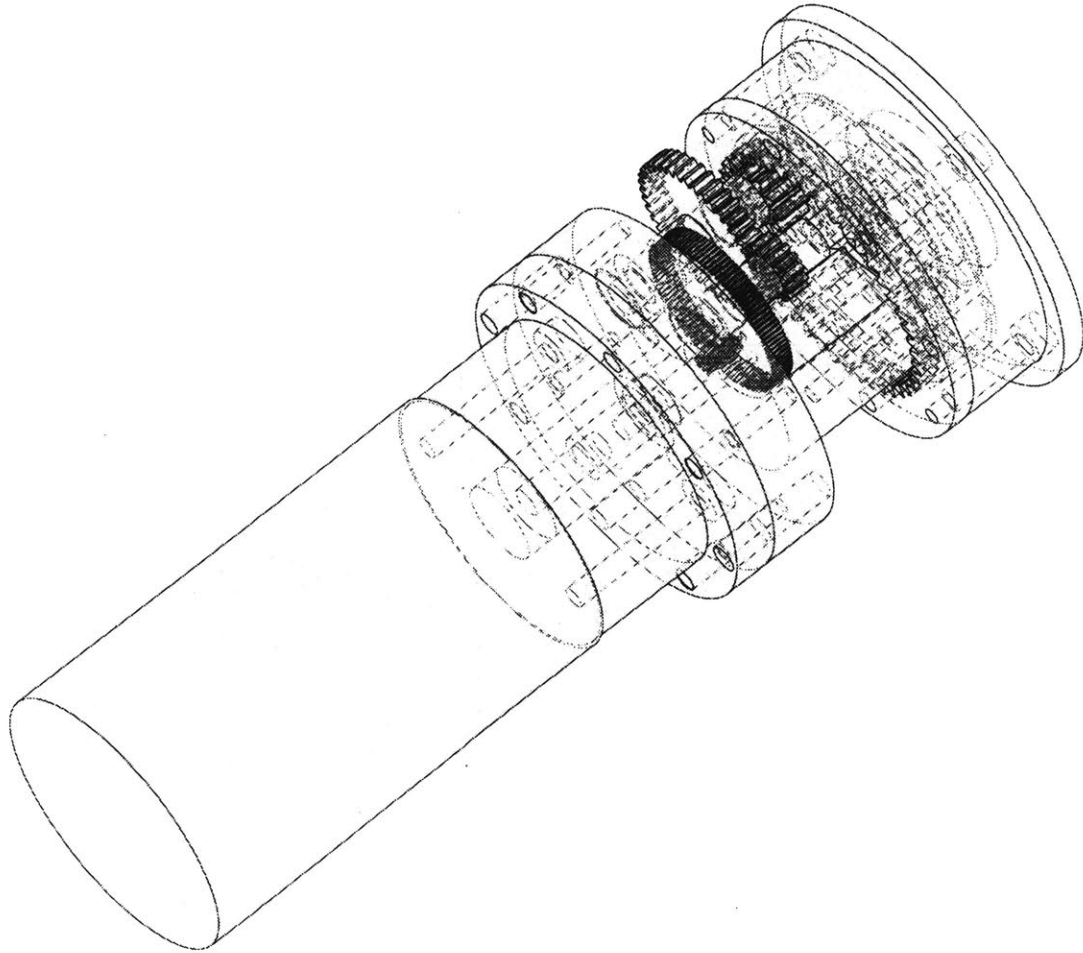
In-Line Spur Gear Actuator Prototype CAD
